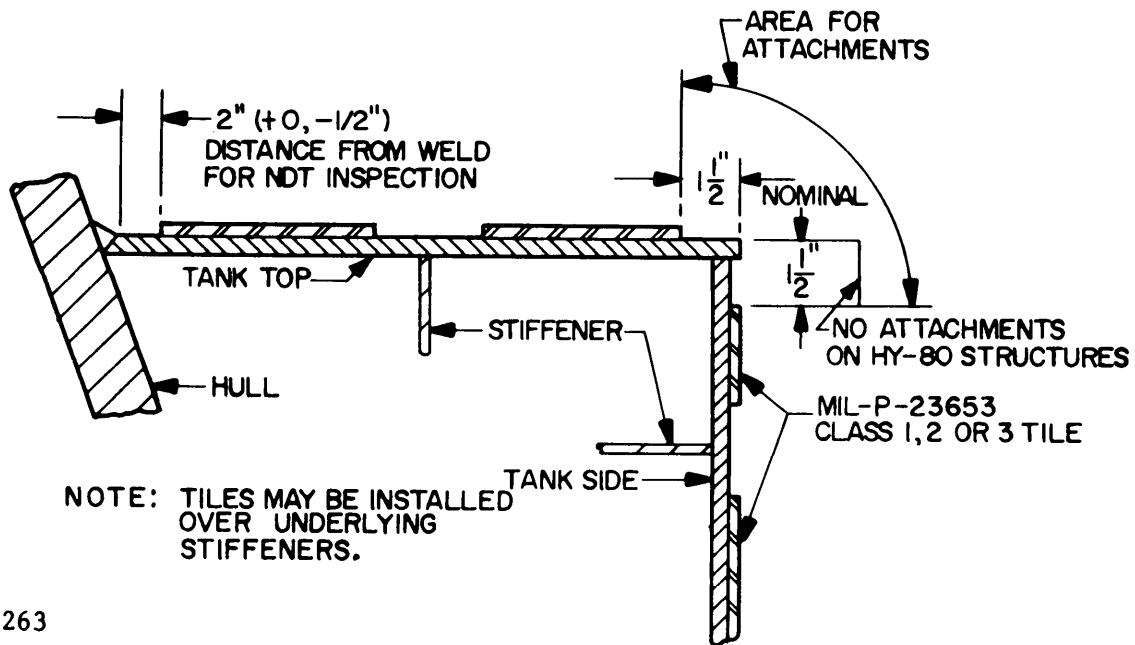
Typical installation of damping tiles on hull frames (not to scale).
